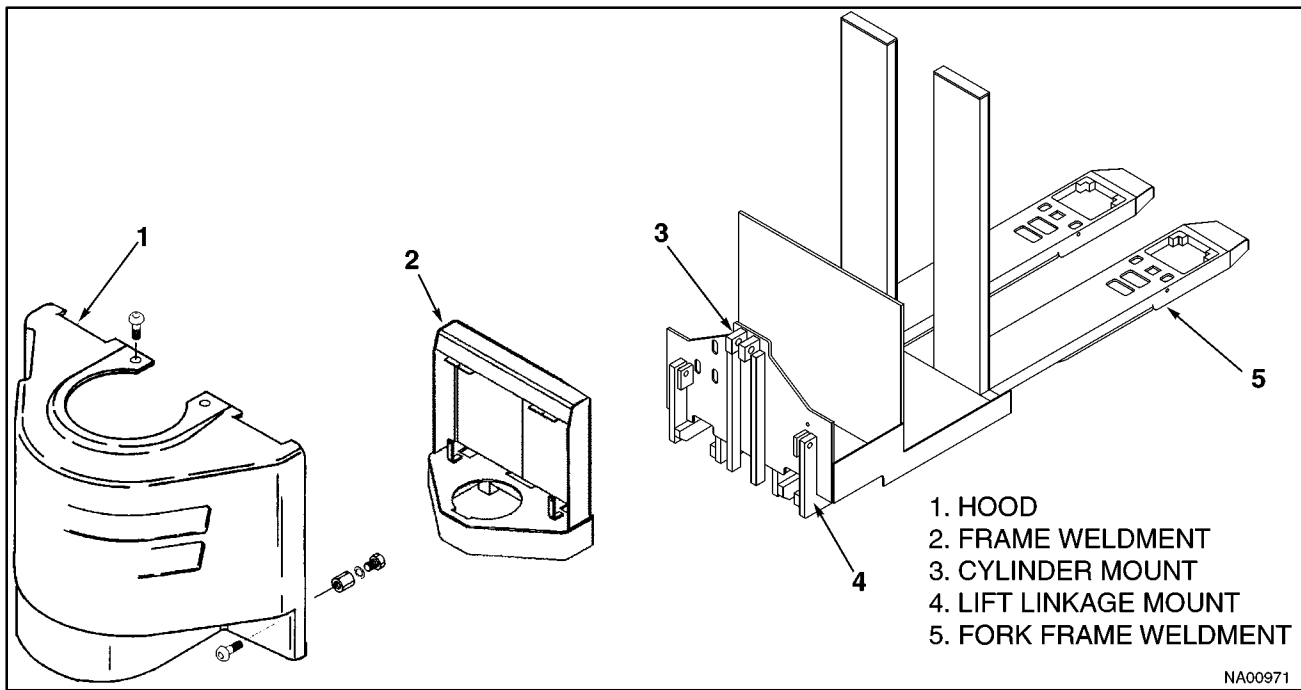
FRAME WELDMENT – C60-80XT2
